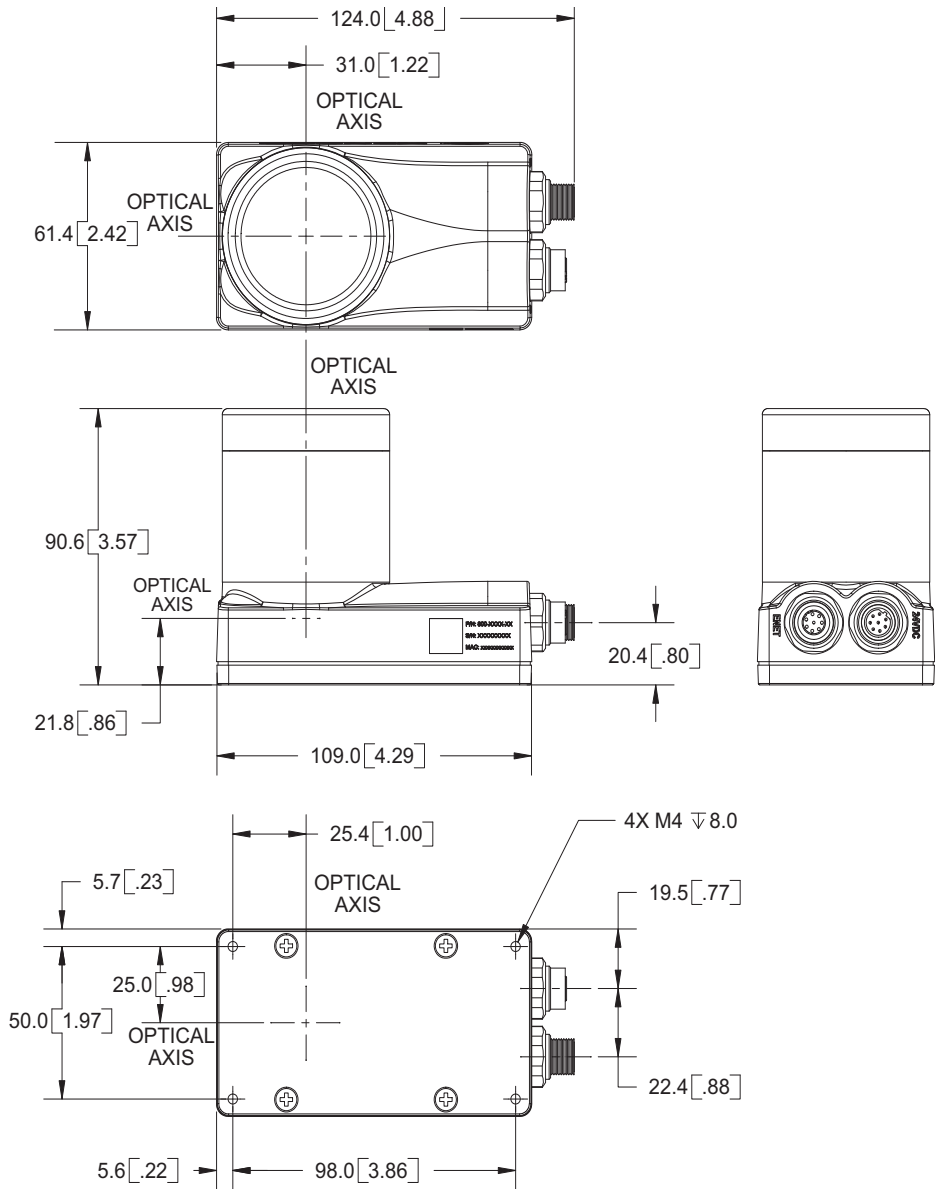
Stainless Steel Vision System Dimensions (With Lens Cover)
